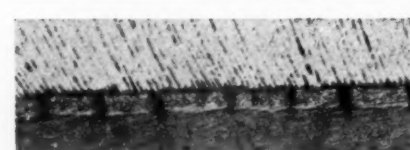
Same wire as Fig. 31, wrapped on own diameter. Cracking, but no flaking.
